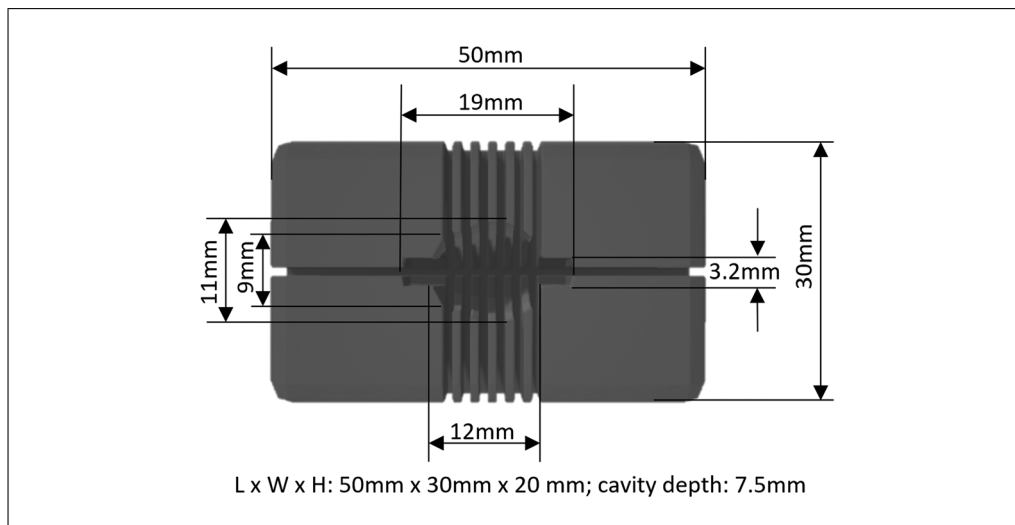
The structure and dimensions of the custom-built cutting mold used for preparing the mouse brain slice.
